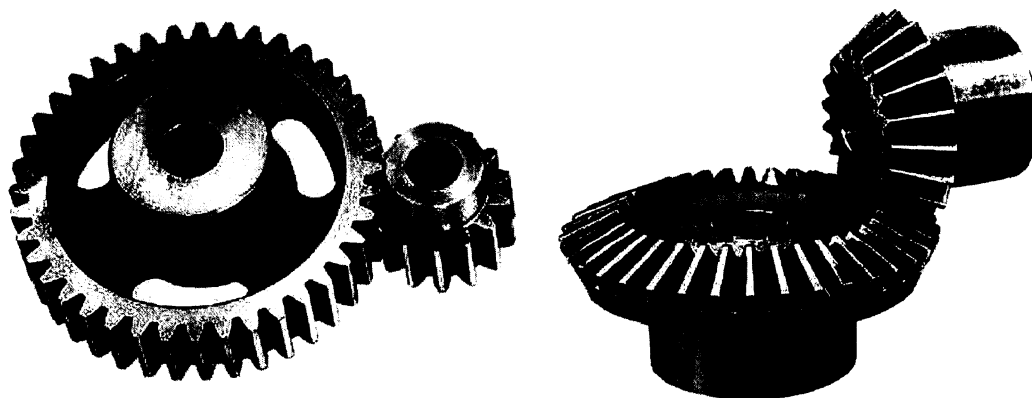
A cogwheel (spur-gear) and bevel gear.
